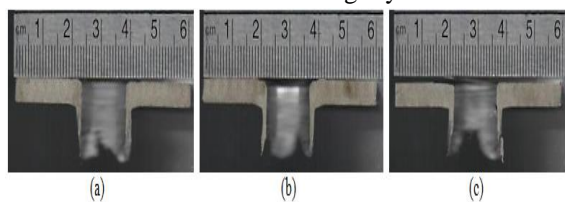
The cross section of friction drilled specimens showing the bushing developed using constant spindle speed of 3700 rpm and several conical angles of (a) 25° , (b) 30° and (c) 35° .
